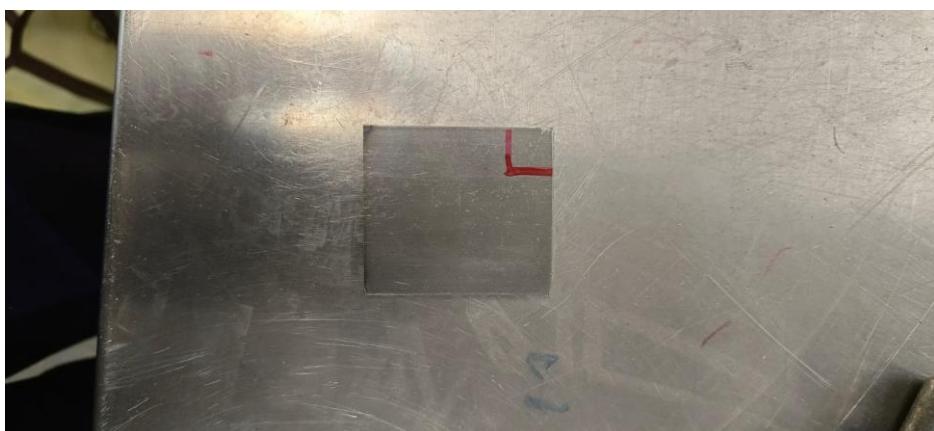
Mark the shape that is to be cut by a hacksaw with marker pen.
